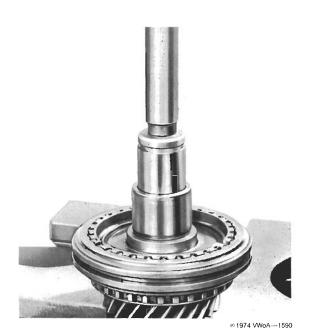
4th gear needle bearing inner race being pressed off together with synchronizer hub and 3rd gear.
